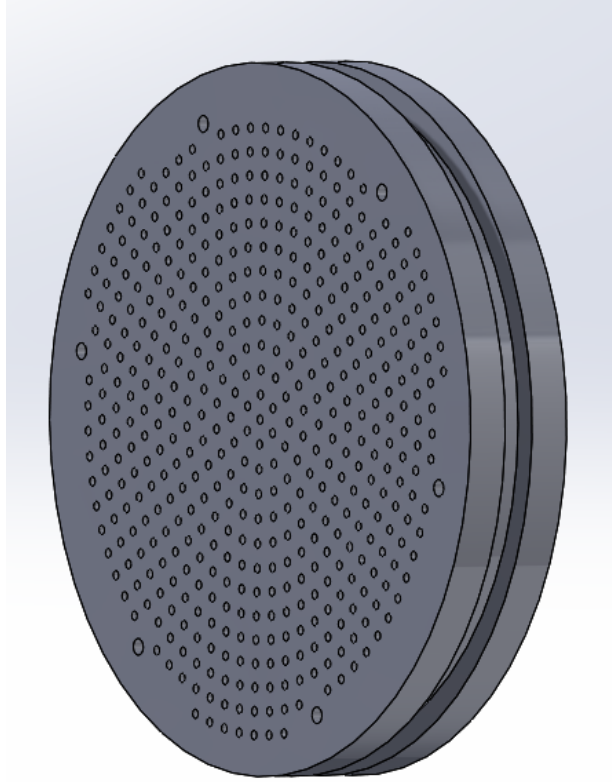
Fiber Guide 3 with radial O-ring groove added.
